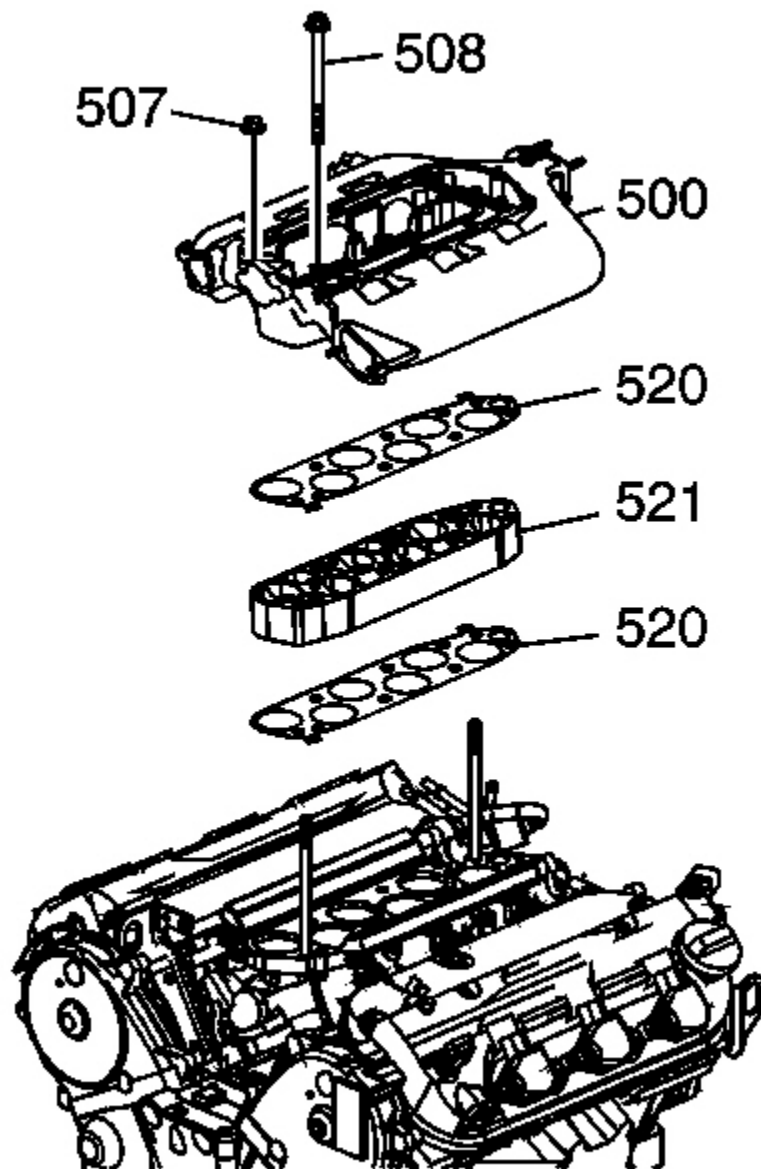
Identifying Bolts, Nuts, Manifold, Gaskets & Spacer
